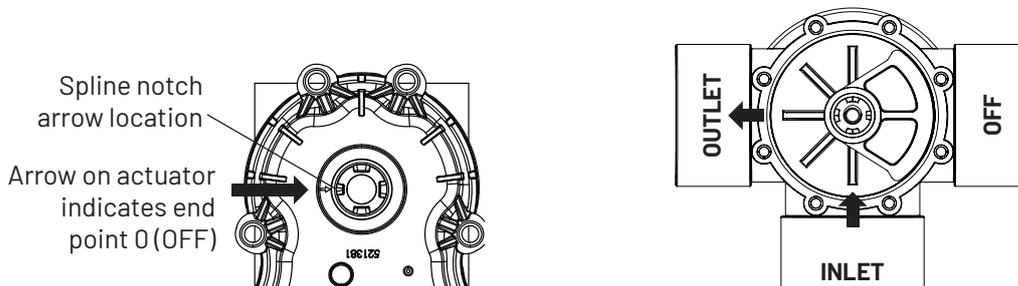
Actuator shaft spline (IntelliValve actuator shown).
